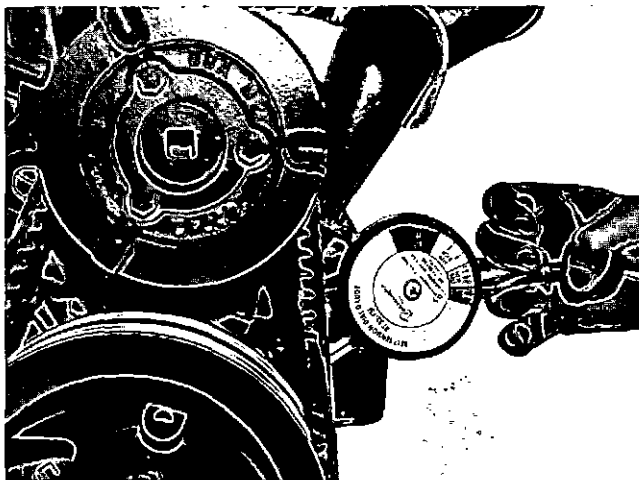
, V41922. Checking belt tension with ST-968 Belt Gauge
